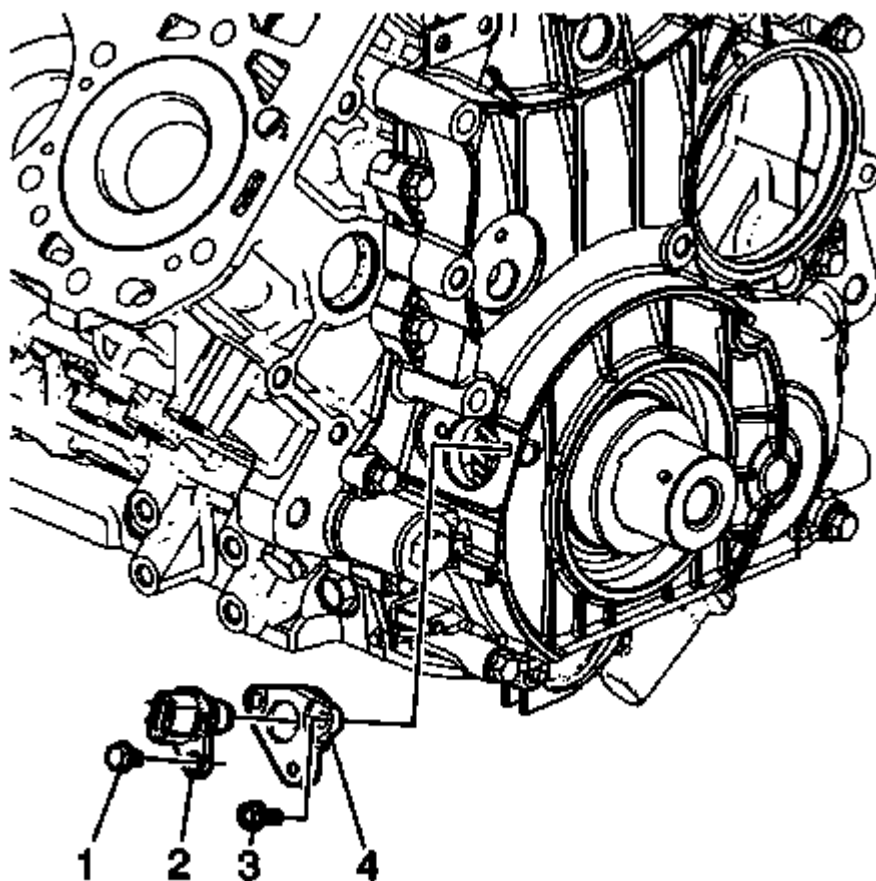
Identifying Crankshaft Position Sensor, Bolts And Spacers
